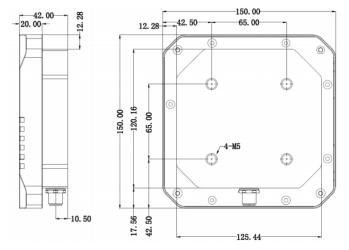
SG-UR-I82 Mechanical Dimensios (Unit mm)
